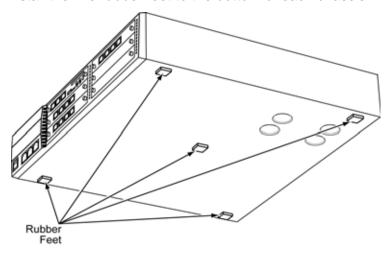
Attach Rubber Feet to CHS2U-US Chassis
